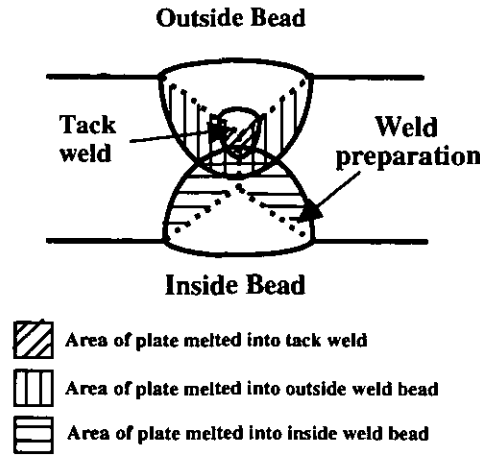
Location of tack weld bead geometry, after [53].
